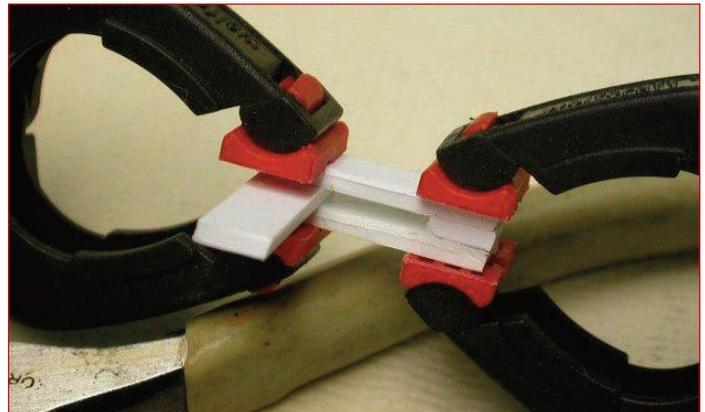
Leftover pieces are cut in half and glued between the double pieces at the opposite end where they are joined to the single piece.
